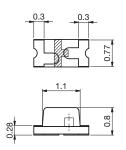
Issue: 1; 17.10.11 22616 technical drawings according to DIN specifications
